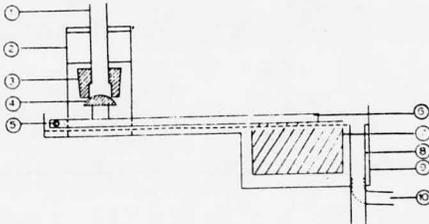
A simple demand valve: 1, inlet pipe; 2, valve body support; 3, valve static member; 4, valve moving member; 5, pivot pin; 6, pivot arm; 7, float; 8, overflow pipe; 9, outer jacket; 10, still feed pipe.
